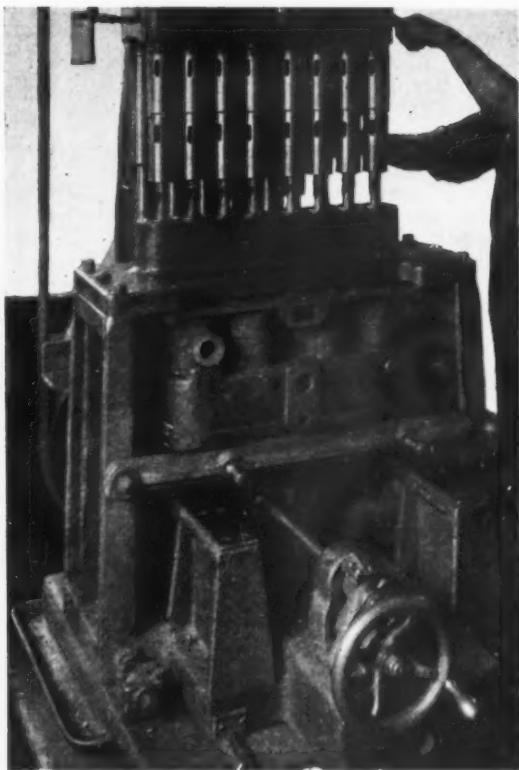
Valve tappet holes are drilled and reamed on this machine
